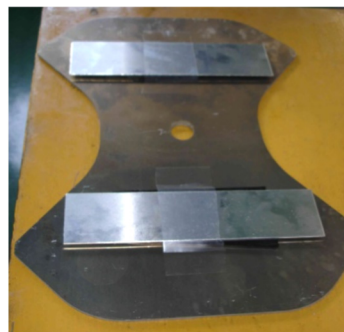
Rubber sheets and aluminum sheets were attached to disperse the bending force.
